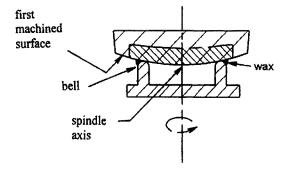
The partially machined lens from Fig. 15.10 mounted on the bell of a SPDT machine for shaping and finishing the second lens surface, the rim, and bevels.
